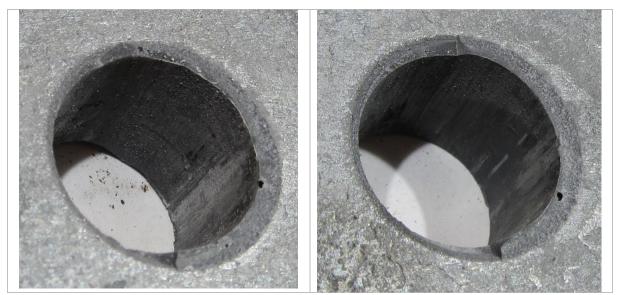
Visual inspection of Dex R2K resin in bolt holes
